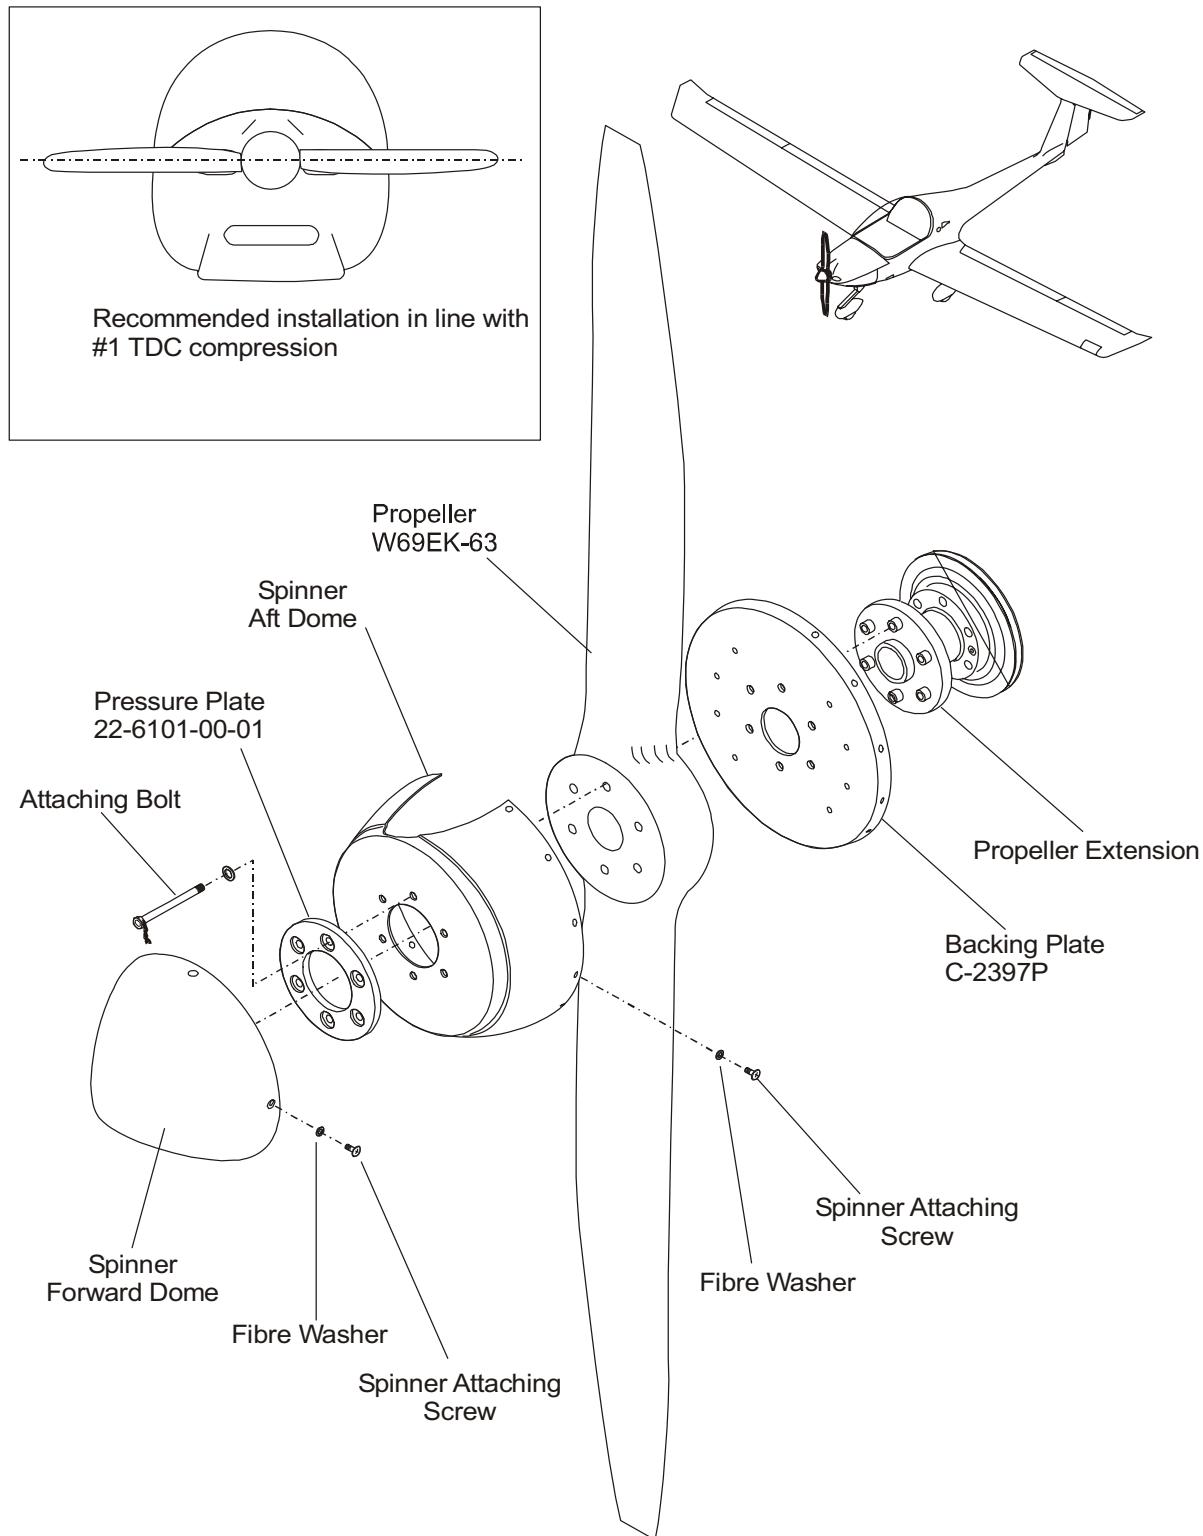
W69EK-63 Sensenich Propeller Assembly
